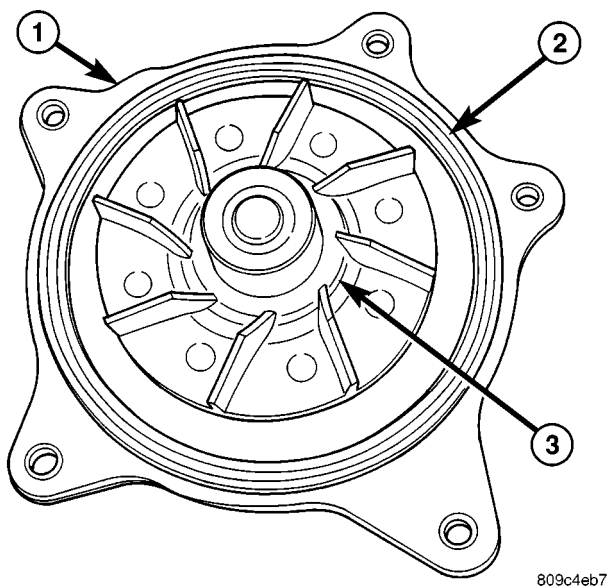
Water Pump Inspection - 3.3/3.8L EngineINSTALLATION
